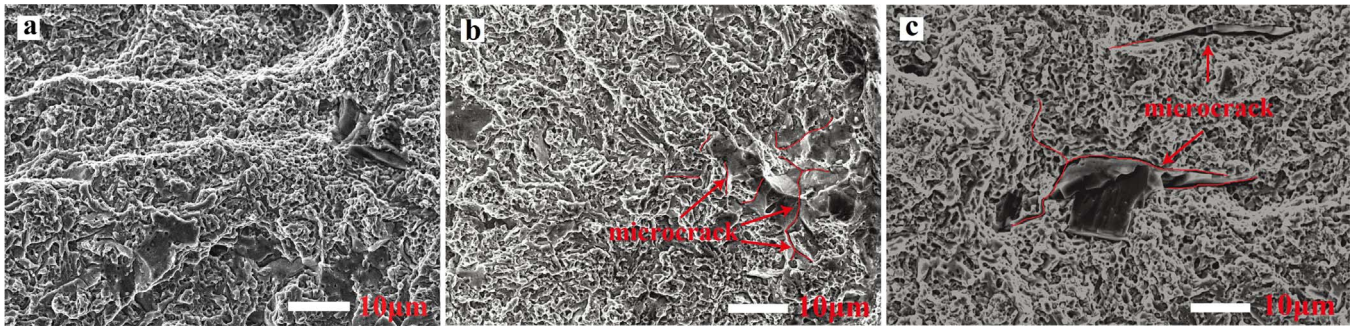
SEM fractographs for new (a), 1.2 Mkm (b) and 2.4 Mkm (c) bearing uniaxial tensile samples, and it is seen that the fracture cracks were all initiated from the material inclusion zones, but for the 1.2 or 2.4Mkm samples, which have more and bigger micro-cracks near the initiated zones.
